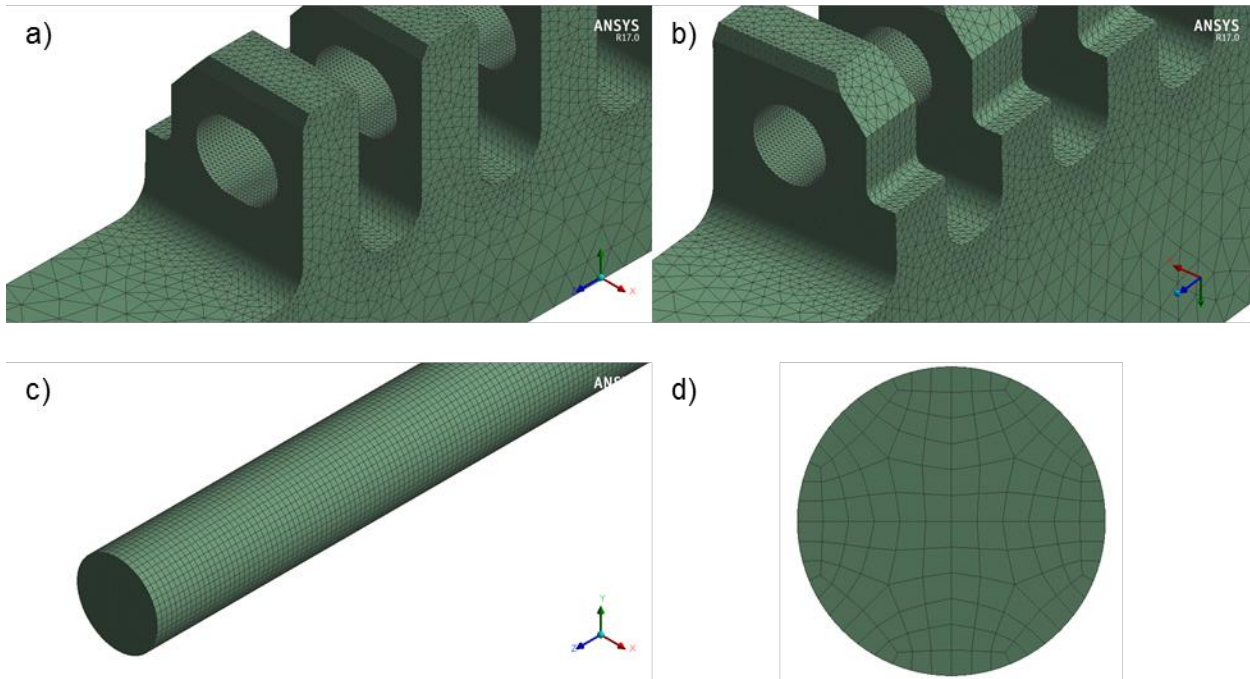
Generated mesh for each part of the closure device: a) Lower part b) Upper part c) Pin d) Pin front view
